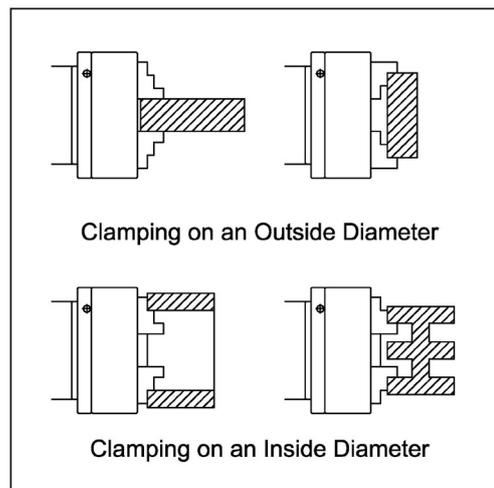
Examples of workpiece mounted in the 3-jaw chuck.
